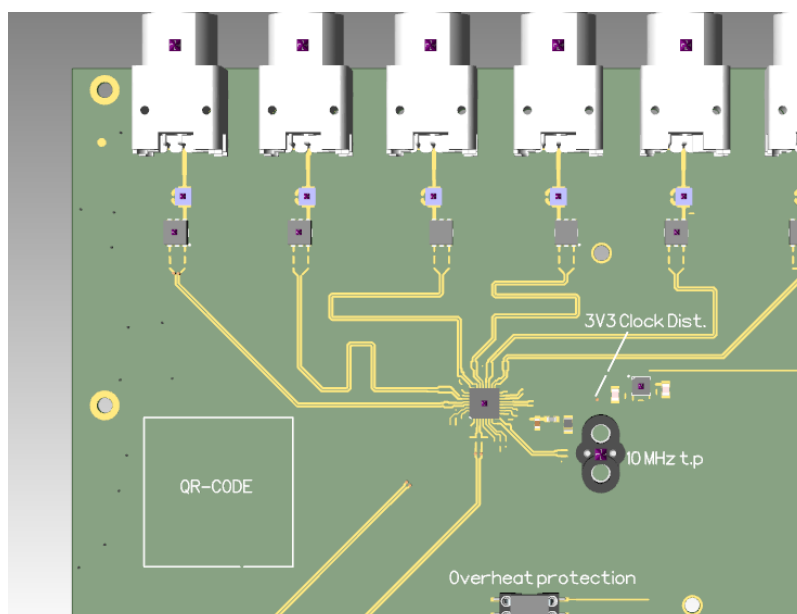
Location of the QR-Code on the top side of the CCD PCBA.
